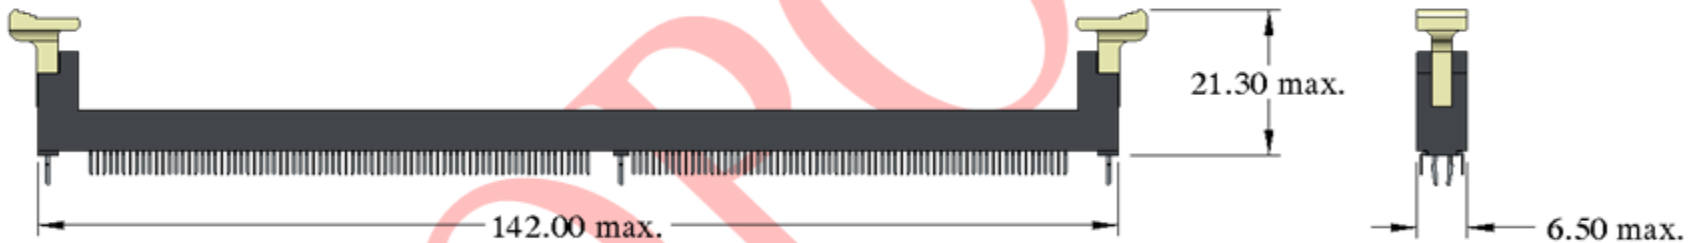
Plated Through Hole (PTH) Connector Socket Outline
